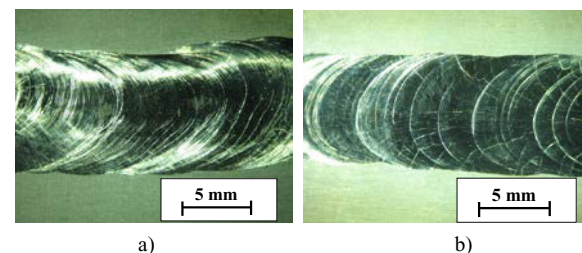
Morphology of surface of welds on alloy: a) Nb (1 kJ/mm) and b) Ta (1.3 kJ/mm).
